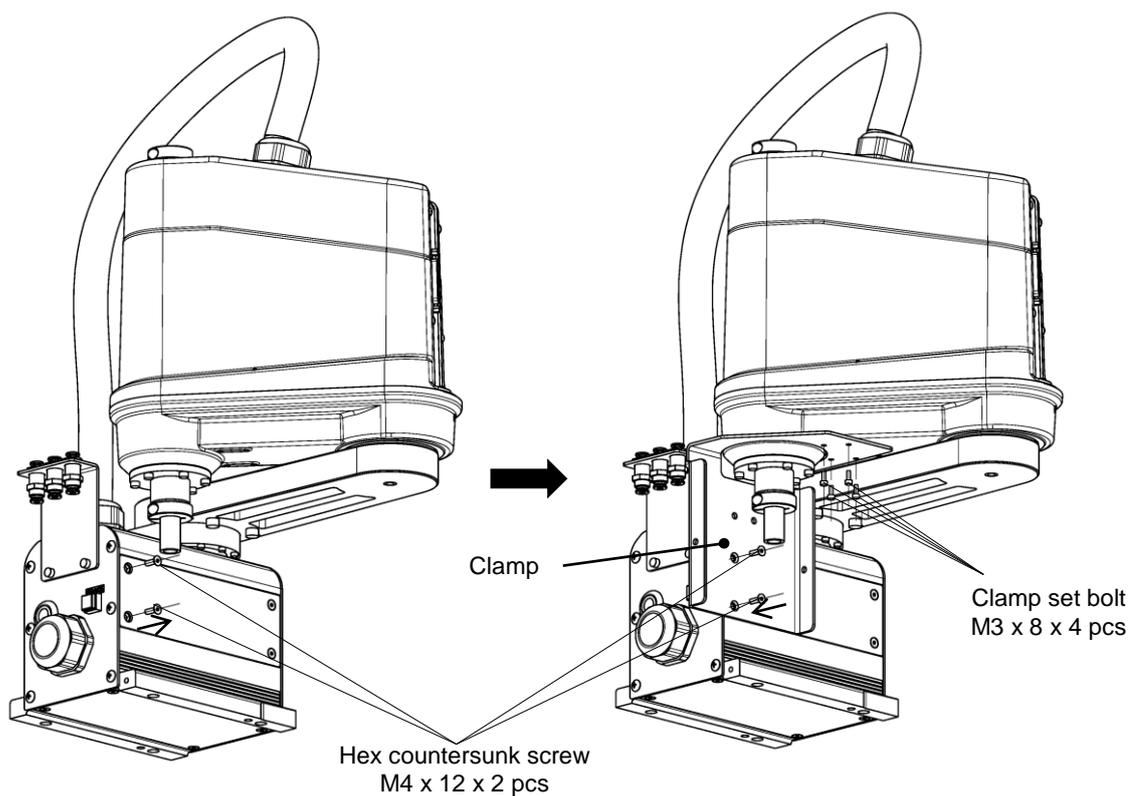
Attaching the clamp (KHL-300/KHL-400)
